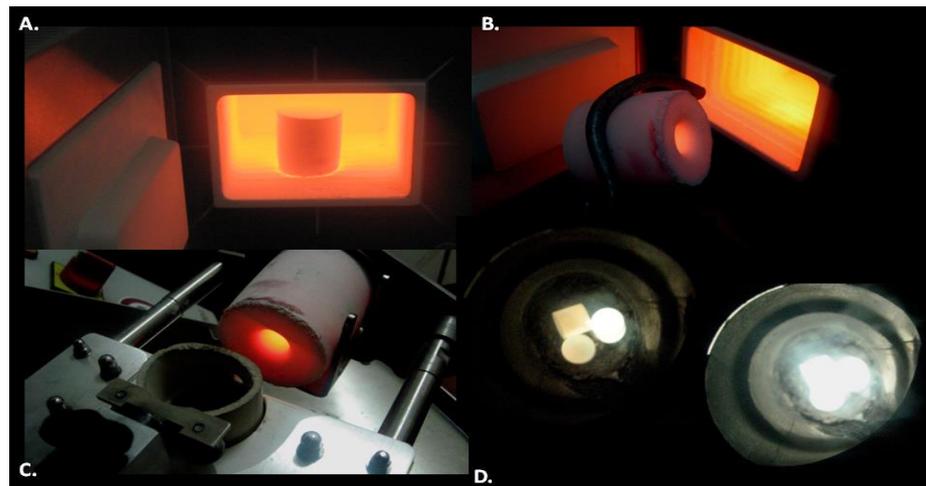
(a) Refractory mould inside the preheating furnace; (b) Extraction of the refractory mould from the preheating furnace; (c) Positioning the mold in the melting-casting machine; d. Melting the Co-Cr alloy in a ceramic crucible.
